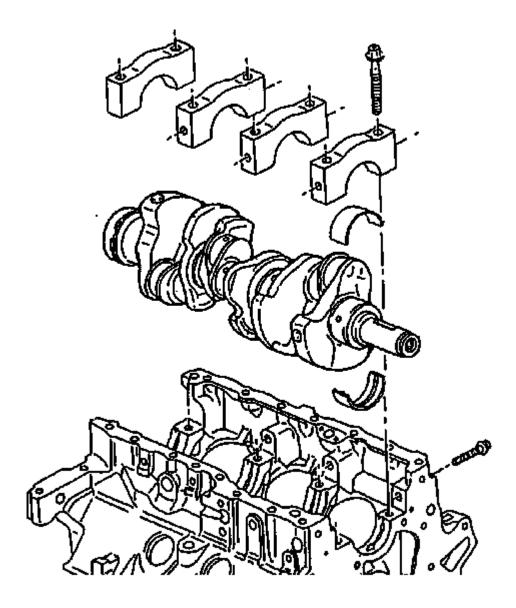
View Of Crankshaft, Bearings And Bearing Caps Courtesy of GENERAL MOTORS CORP.
